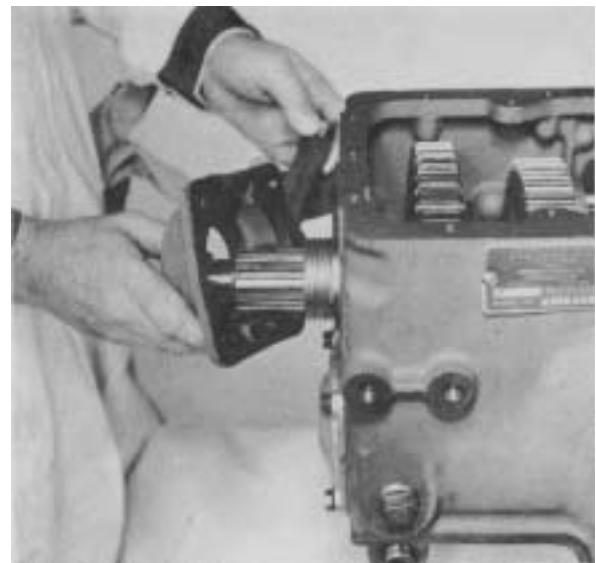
Remove mainshaft rear bearing cap and speedometer drive gear.
